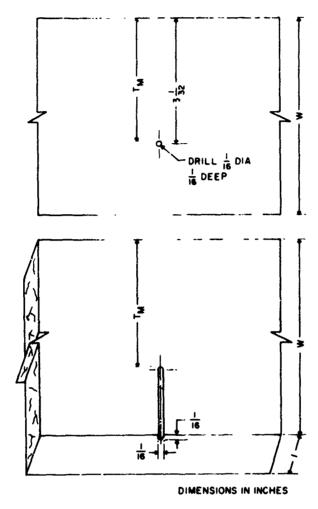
Preparation of DT specimens for EB welding of crack-starter weld
